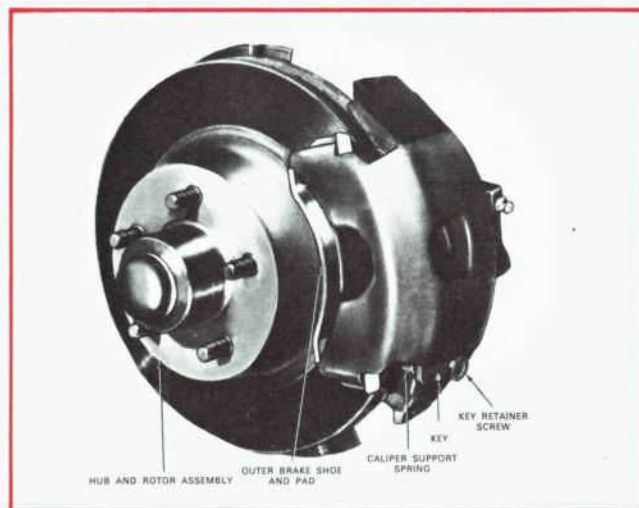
The sliding caliper disc brake assembly used on the Continental Mark IV, Thunderbird, Montego, Torino. Note the position of the key retainer and screw.
